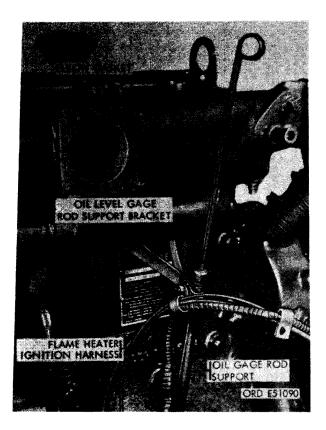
REMOVING OR INSTALLING FLAME HEATER IGNITION UNIT.
